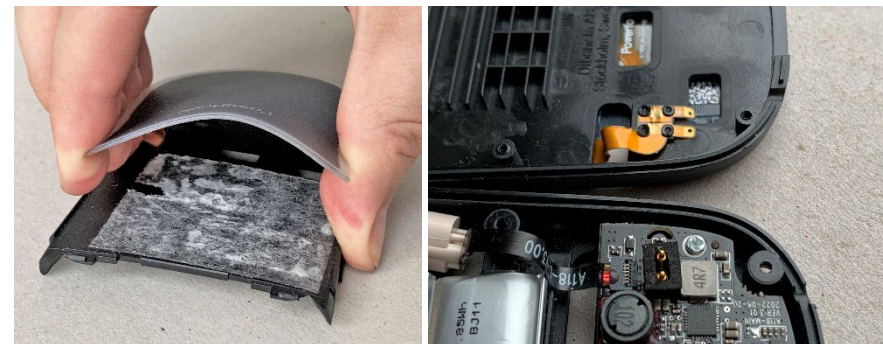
(a) Flexible PV panel attached to inner housing using double sided adhesive tape (b) PV panel attached using flex cable and PoGo pins to prevent damage to cables and connectors during assembly; spring-loaded PoGo pins put under tension by four self-tapping screws
